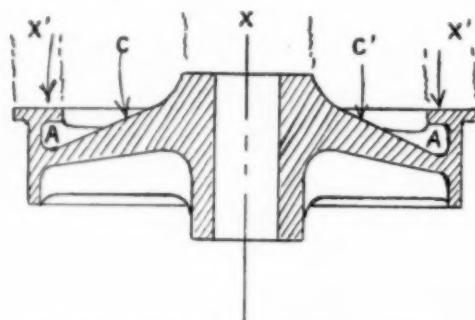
WHEELS WITH RIBS UNDER INTERNAL FLANGE AND HEAVY CONE CENTER
